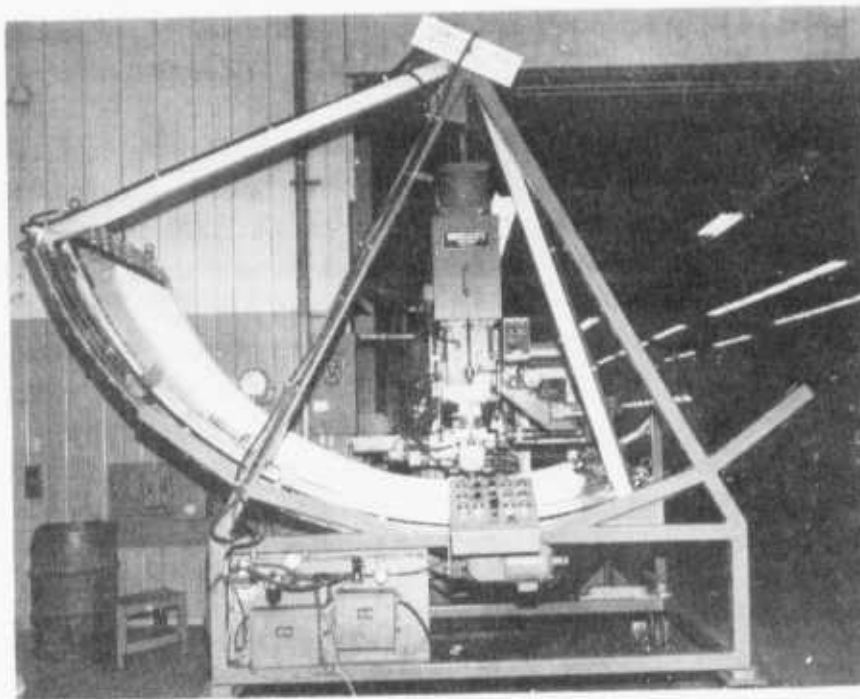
PARTIAL WELDBONDED ASSEMBLY IN SPOT WELD POSITIONER
